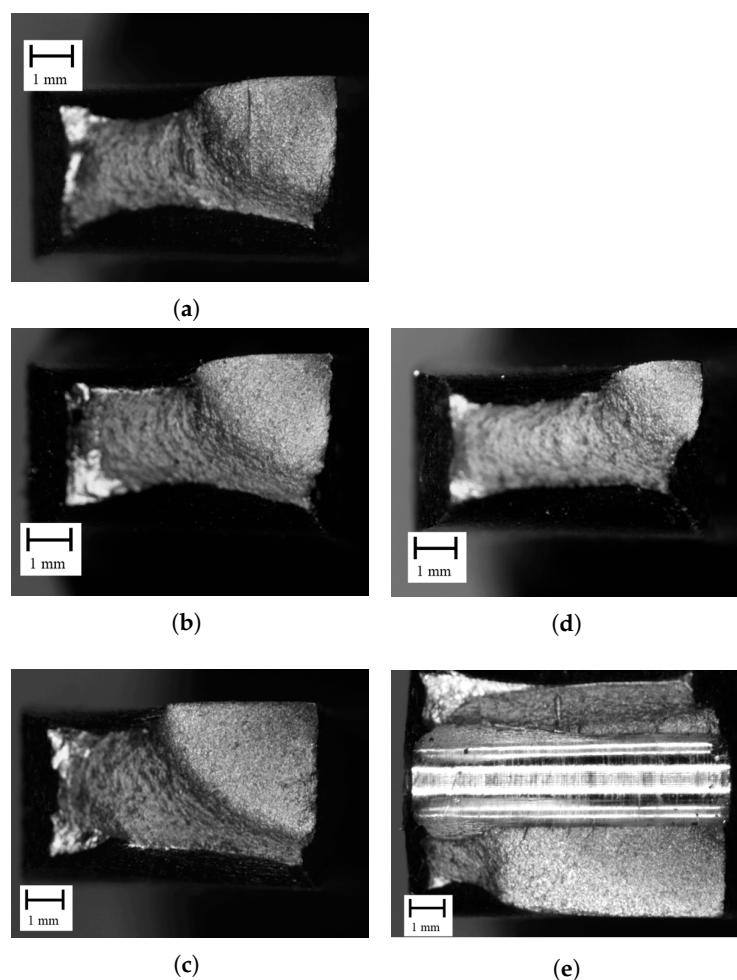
Images of the fracture surface of the specimens tested. (a) Fatigue specimen with $R = 0.01$. (b) Fatigue specimen with $R = 0.1$. (c) Fatigue specimen with a pre-strain value of $\epsilon_{res} = 11\%$ and $R = 0.1$. (d) Fatigue specimen with $R = 0.2$. (e) Fatigue specimen with a notch and $R = 0.1$.
